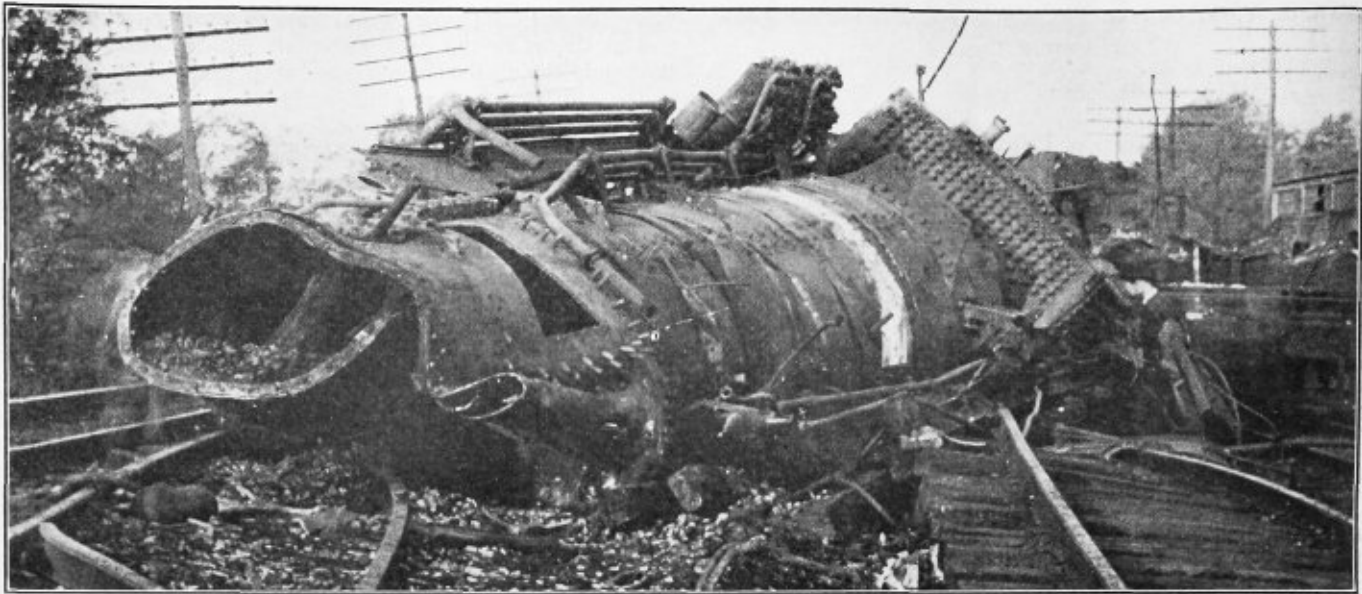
Result of a Boiler Explosion Caused by the Failure of the Crown Sheet
